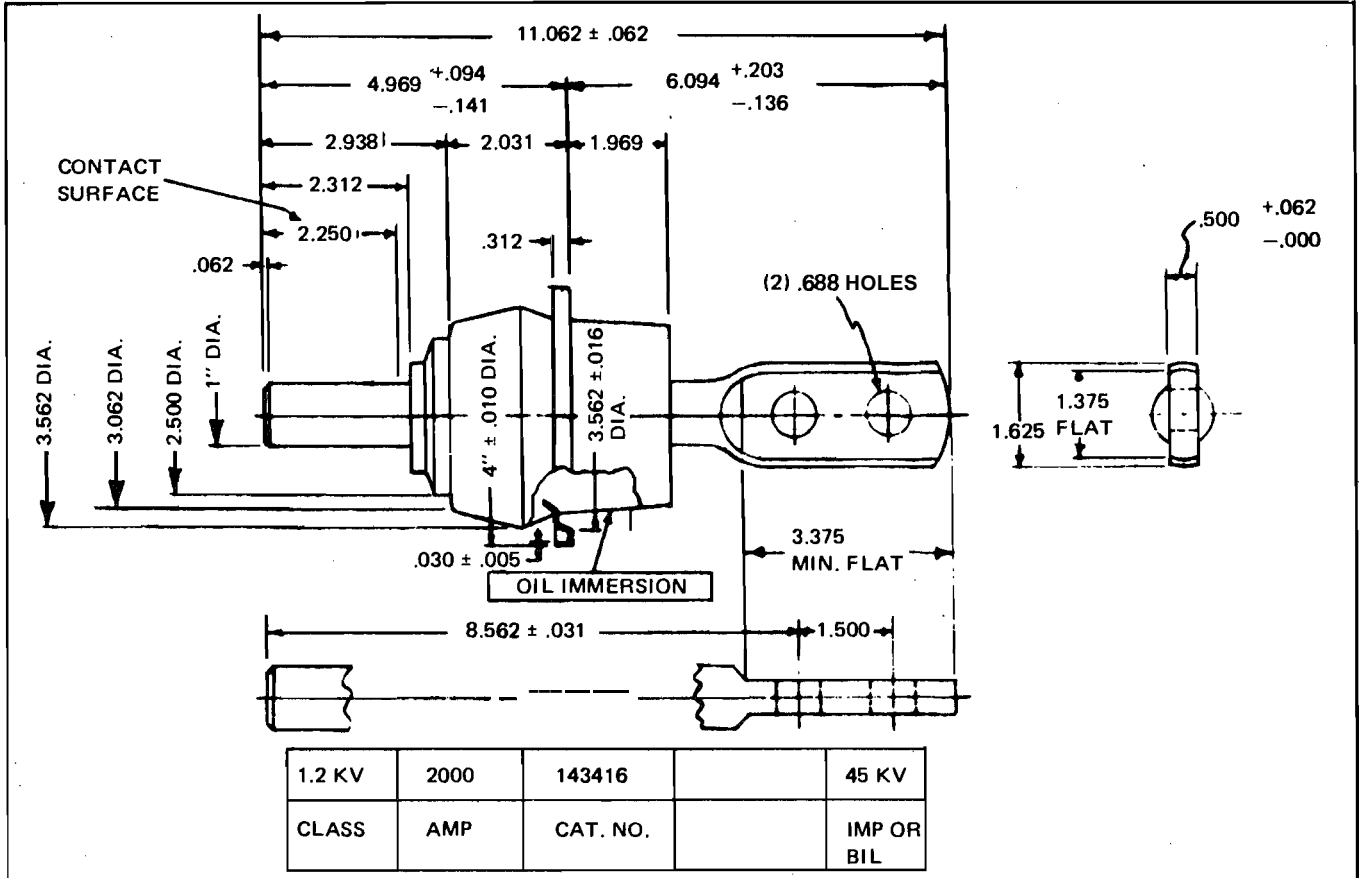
LOW VOLTAGE BUSHINGS. E-17286
